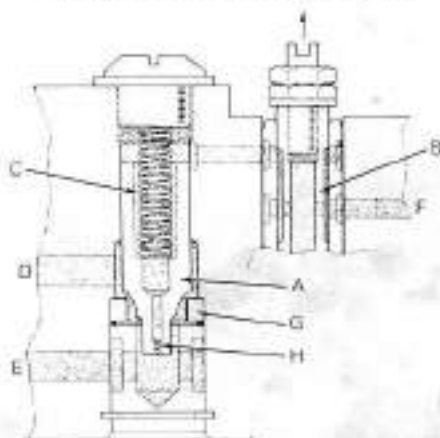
View showing pressure balanced valve operation. With spool valve (B) passage (F) open, fluid pressure above valve is lowered as flow through metering hole (H) is not sufficient to overcome loss through open spool valve. Thus, pressure in passage below valve pushes plunger (A) away from seat (G) allowing oil to flow out passage (D). Fluid flowing through metering hole flows out through passage (F).
